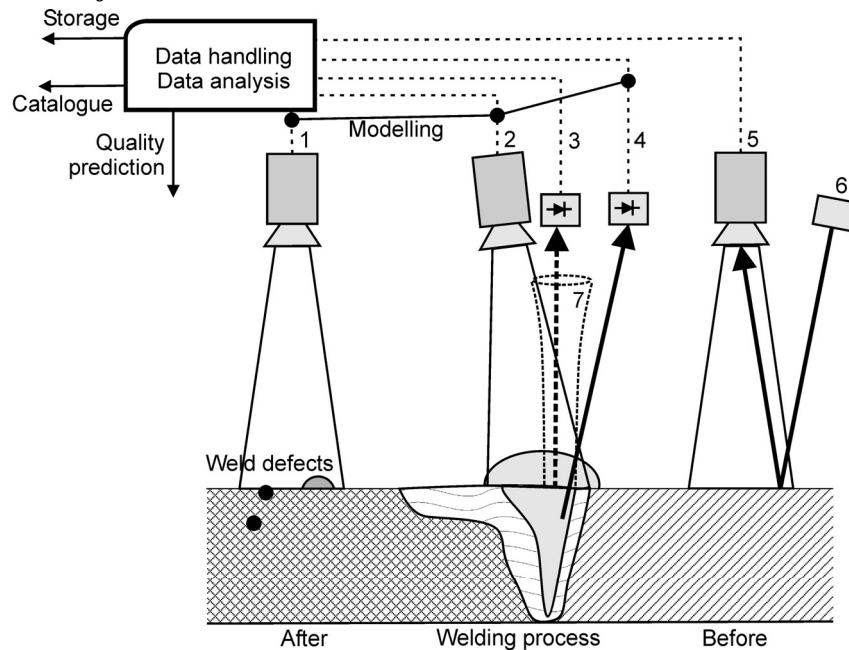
Scientific approach: developing and modelling a correlation between conditions, surface motion, weld result and the sensor signal, and data handling
